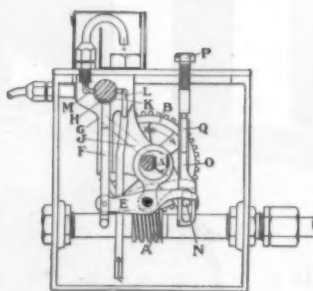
DOUBLE PUMP LUBRICATOR WITH ROTARY VALVE.
